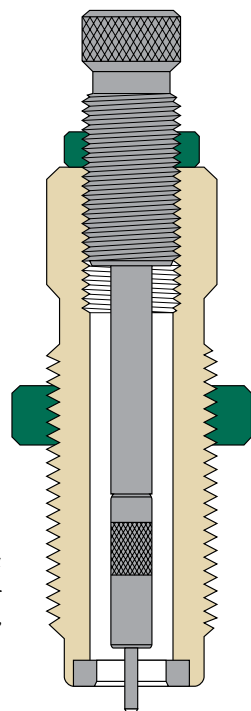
A cutaway of a carbide sizing die showing the carbide ring at the bottom of the die.
